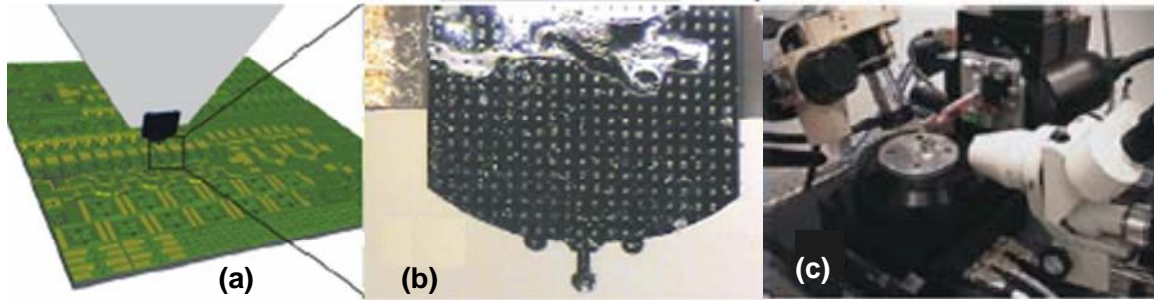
Univ. of Toronto Microassembly Process. (a) Contact head for assembly (b) Robotic Manipulator (c) Principle of assembly. Figure courtesy of [20]
